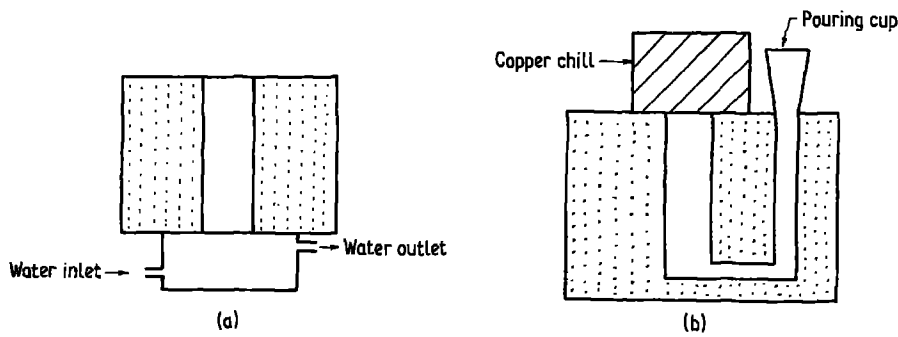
Sand moulds with different chilling arrangements: (a) water-cooled copper chill at the bottom, top-poured; (b) heavy copper chill at the top, bottom-poured.
